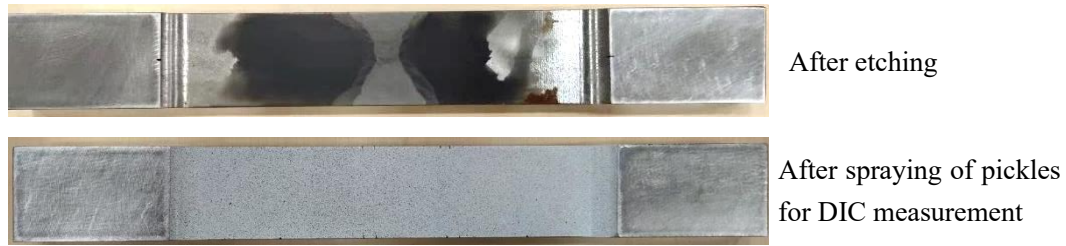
Typical coupons of S690 butt-welded connections before test
